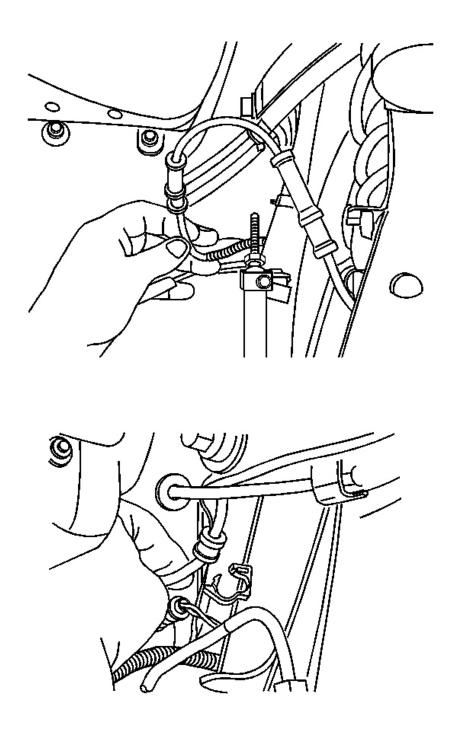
Identifying Wheel Speed Sensor Wiring Harness
